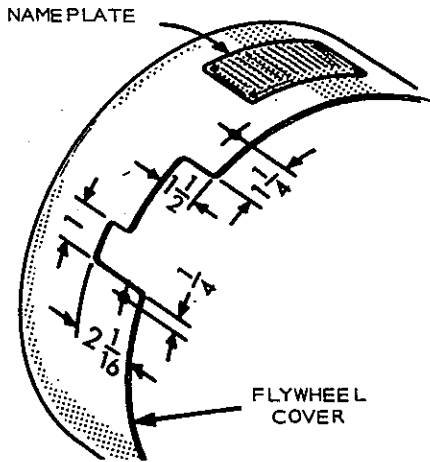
CUTTING NOTCH IN FLYWHEEL COVER (5MJB ONLY)
